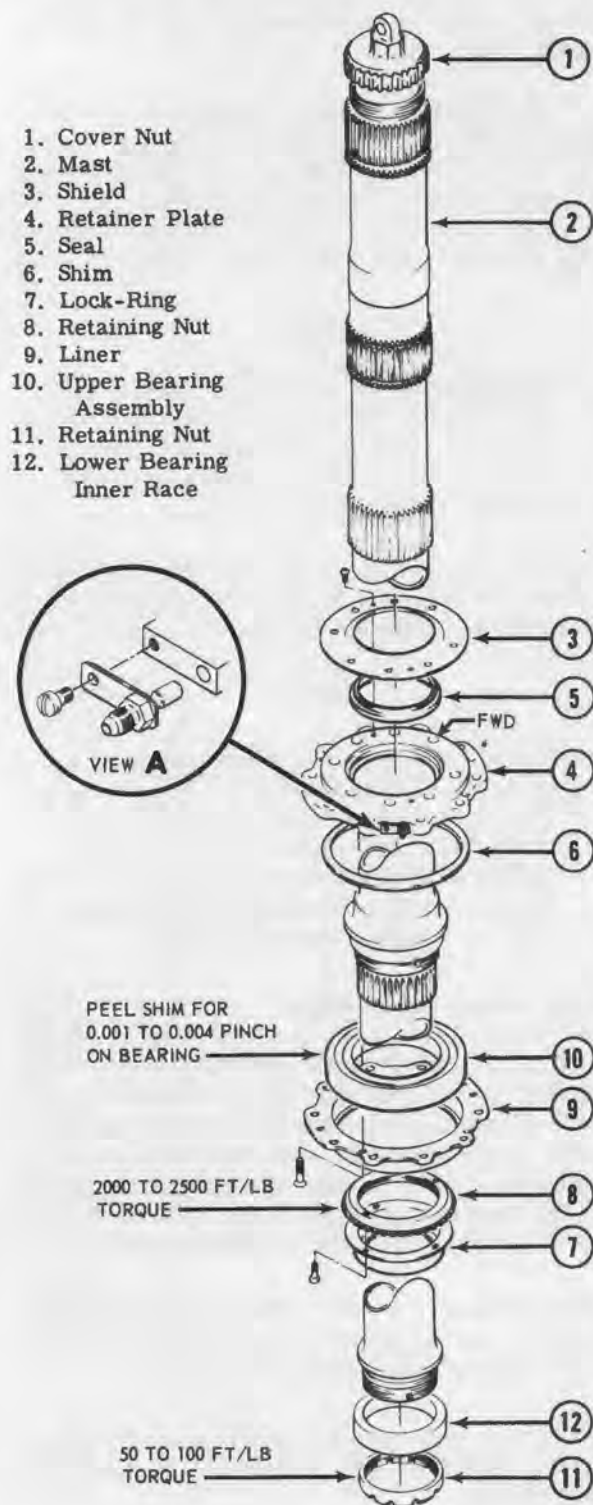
Disassembled view of mast assembly (UH-1B serial no. 63-8500 and subsequent)
